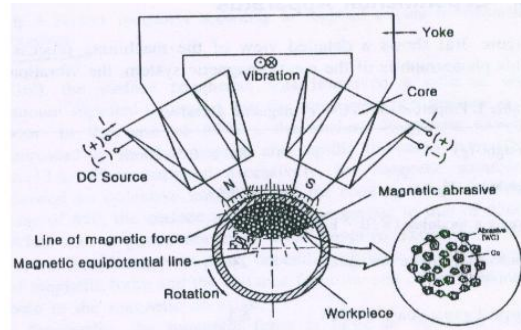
Schematic view of the internal polishing system using magnetic abrasive machining
